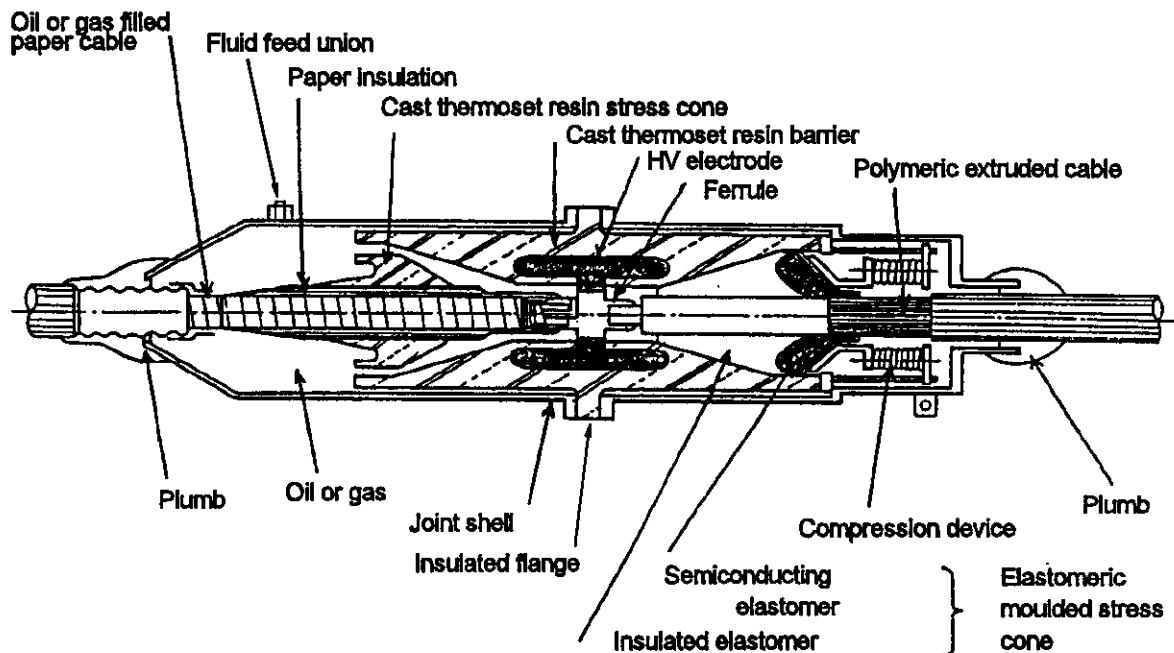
'Polymeric extruded cable to oil or gas filled paper cable' transition joint, single core, 'fed' type
